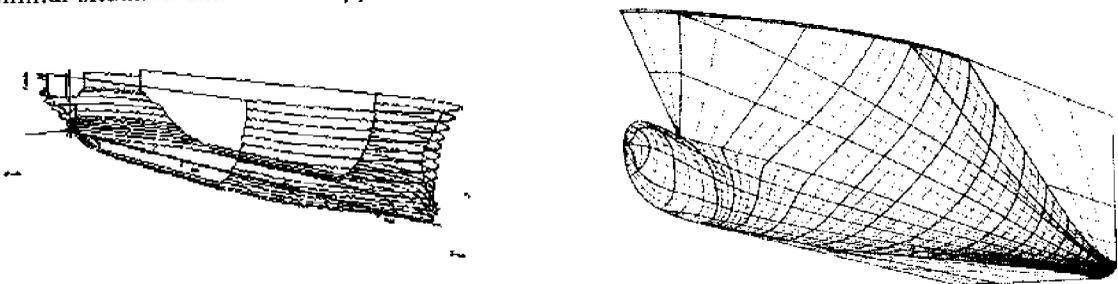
Examples Moulded Form using Traditional Lines and Surfaces
